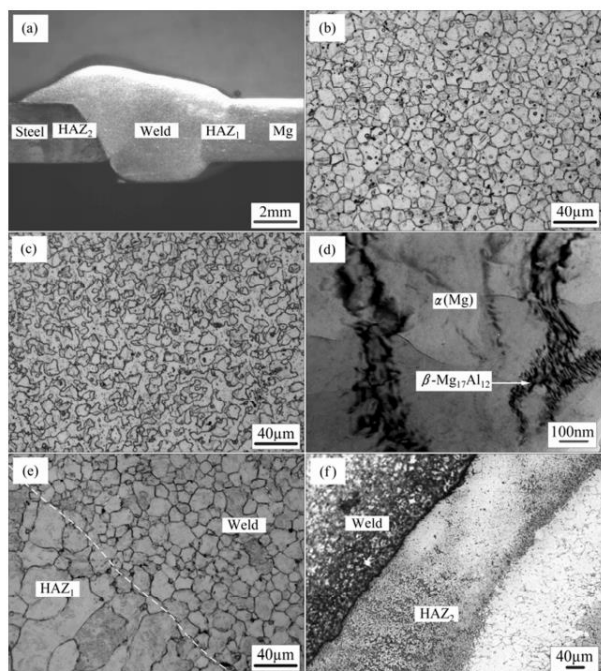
Mg steel joints Microstructures: (a) weld made by AZ31 as filler rod; (b) welded by AZ31 as filler rod; (c) welded by AZ61 as filler rod; (d) TEM Image of joint welded by AZ61 as filler rod ; (e) HAZ1 weld with AZ31 as filler rod; (f) HAZ2 weld with AZ31 as filler rod[24]
